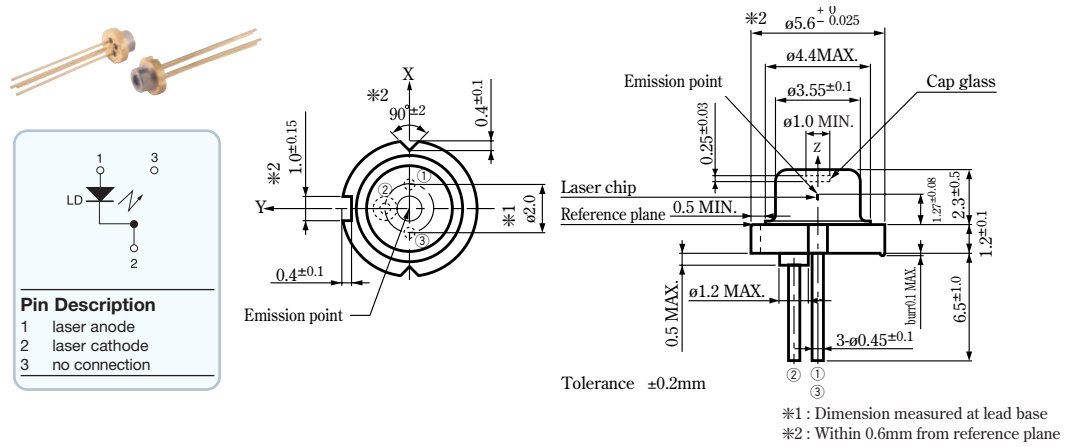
Technical drawings for the Sharp diodes, showing pin connections, package dimensions and tolerances; sourced from [91]
